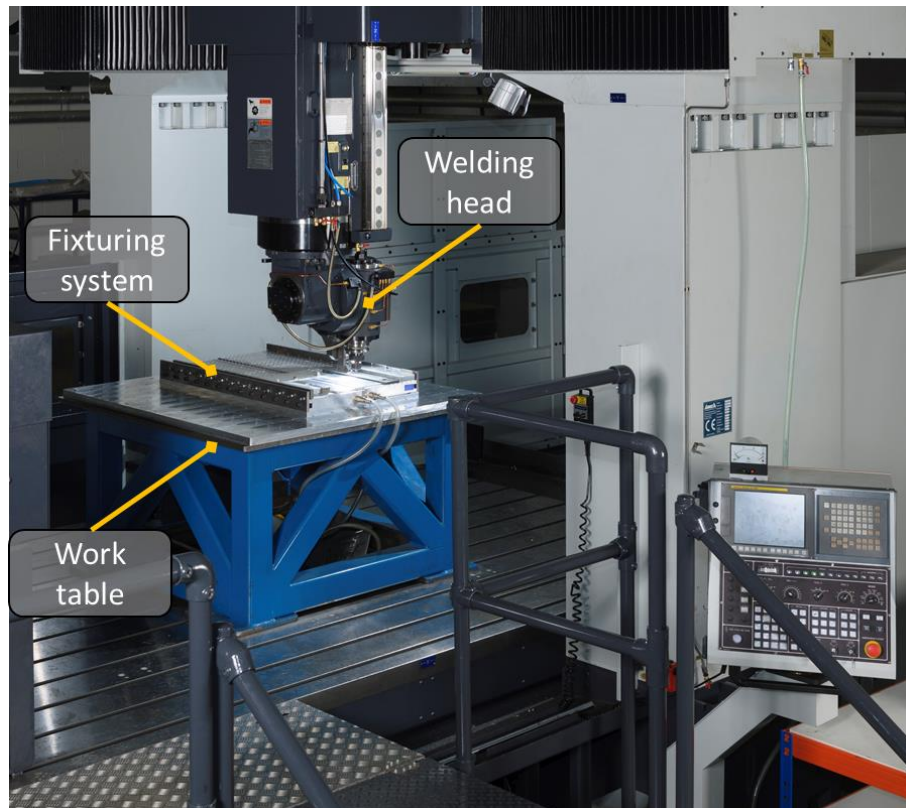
FW-36 AWEA LP 4025Z FSW machine.
